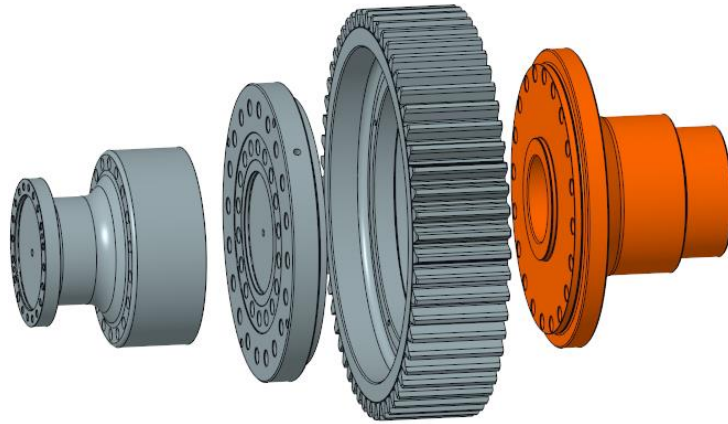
Camshaft extender without (Left) and with (Right) gearwheel.
